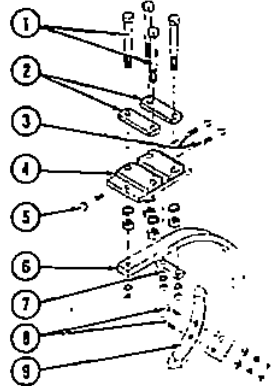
BALK BREAKER ATTACHMENT — MACH. NO. 299053
